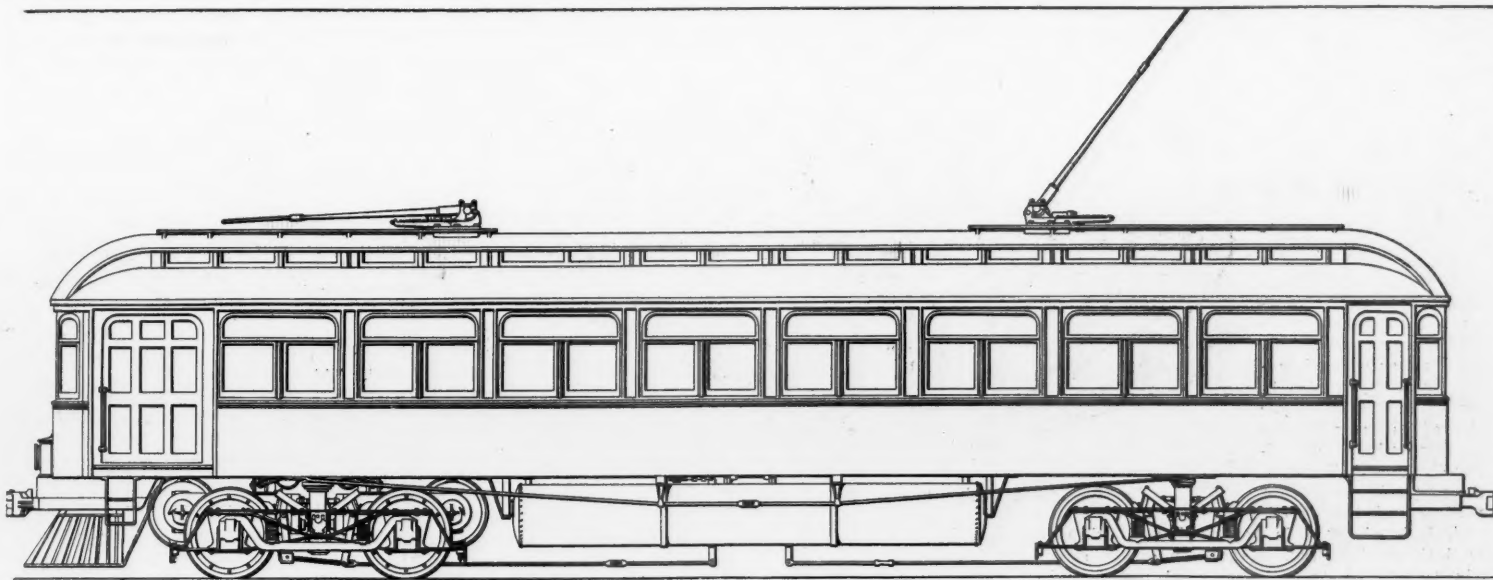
Side Elevation of Car with One Motor Truck, Showing Storage Tanks for Compressed Air Under Car.
